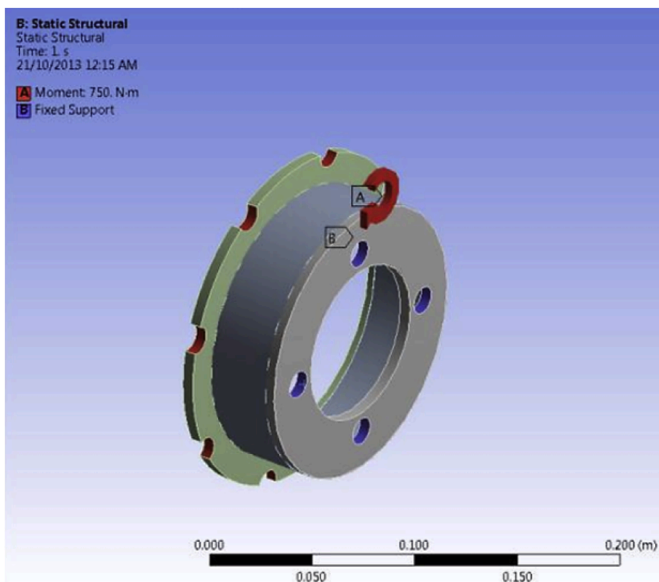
Load and support setup in Ansys for brake rotor hat.
